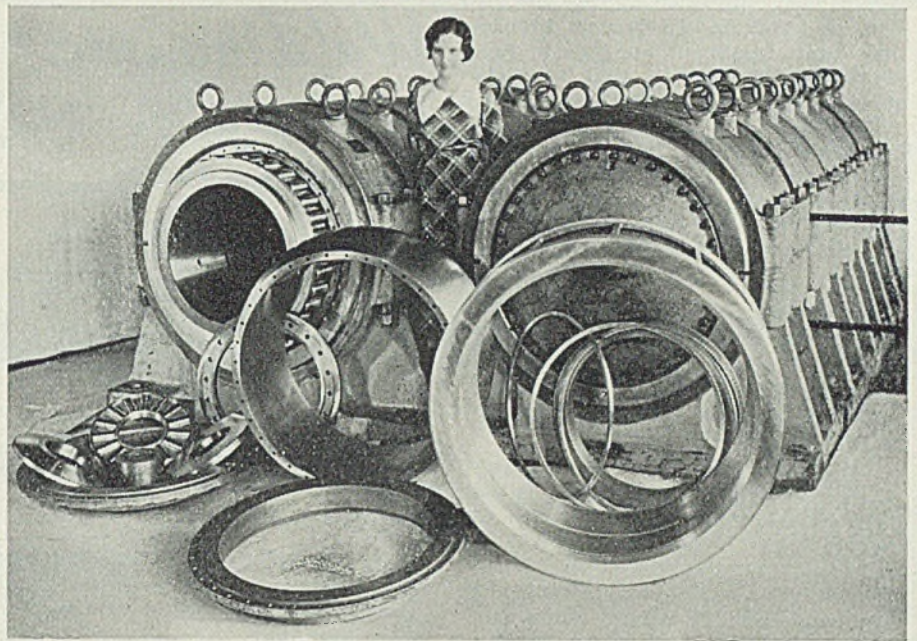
Main sheave bearings and housings for the Buzzards Bay bridge. Total weight of this equipment is 72 tons
